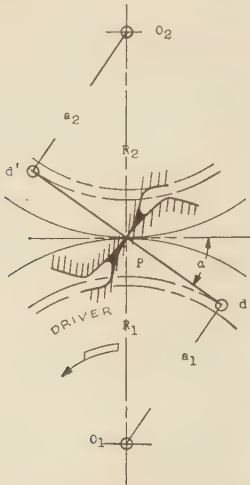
ELEMENTS OF A PAIR OF MATING SPUR GEARS SHOWING ENTRAPPED OIL WEDGE
